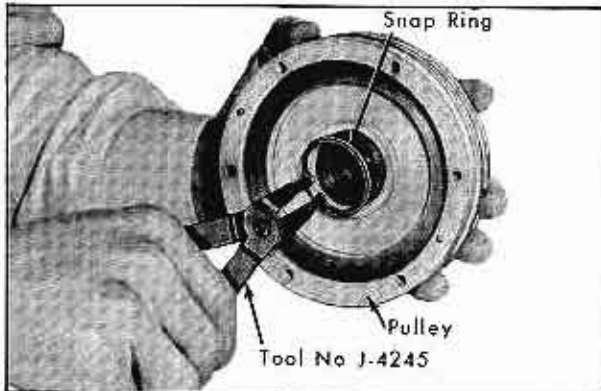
A-19 Removing Pulley Bearing Snap Ring
